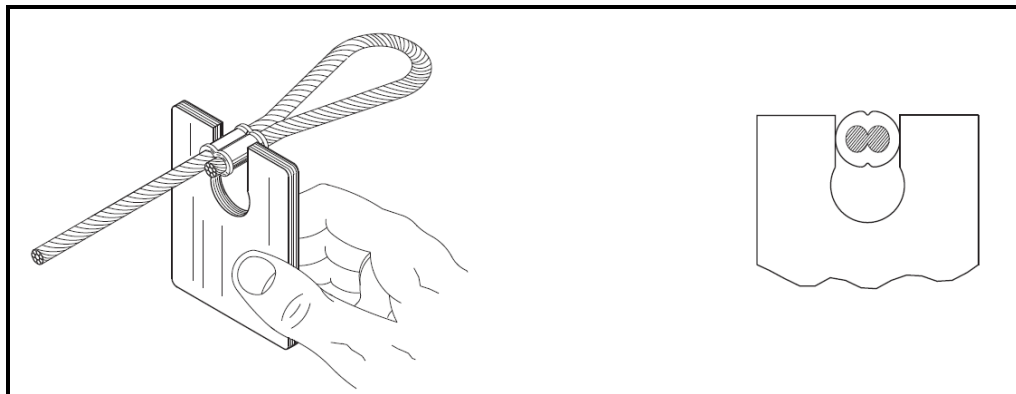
Use a go-type gauge to check that a sleeve is correctly pressed
